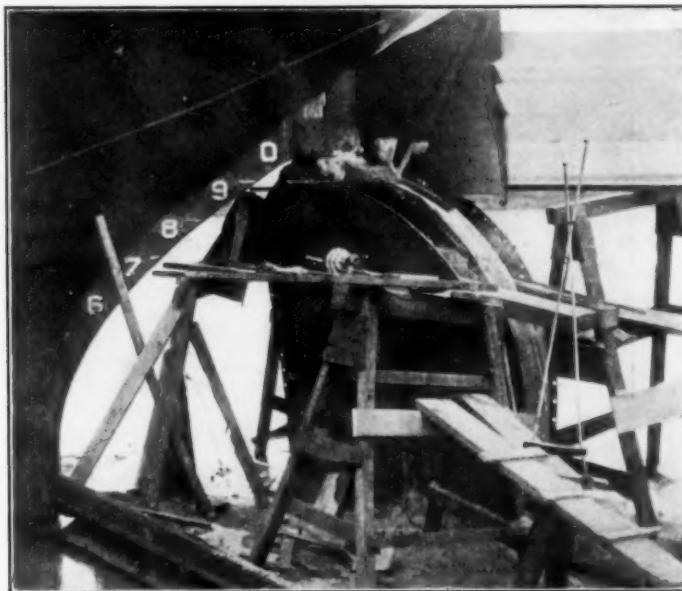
RUDDER FRAME OF STEAMSHIP "DULUTH" SHOWING MATERIALS IN POSITION FOR WELDING. REPAIR EXECUTED WITHOUT PLACING VESSEL IN DRYDOCK
